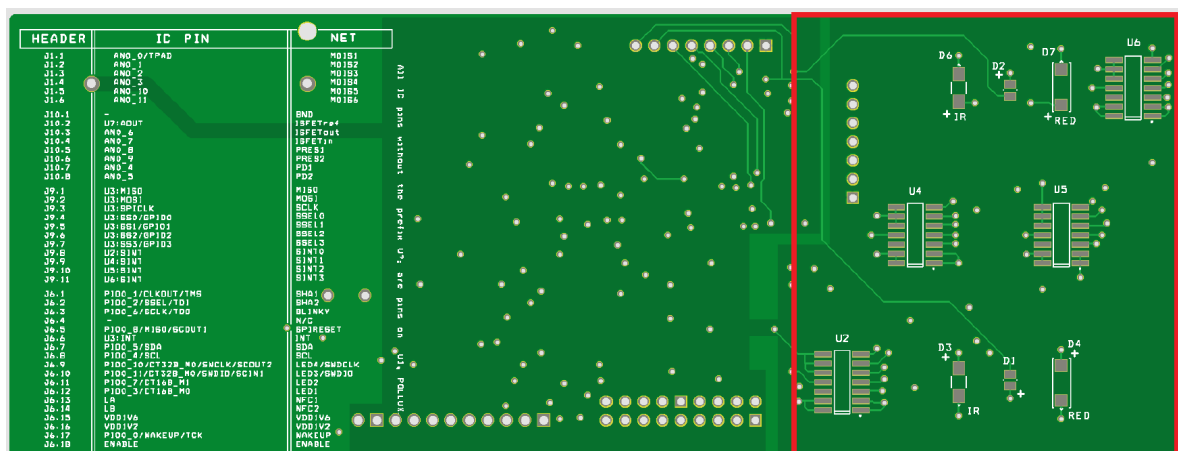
Drawing of the PCB (back), sensor area marked in red.
